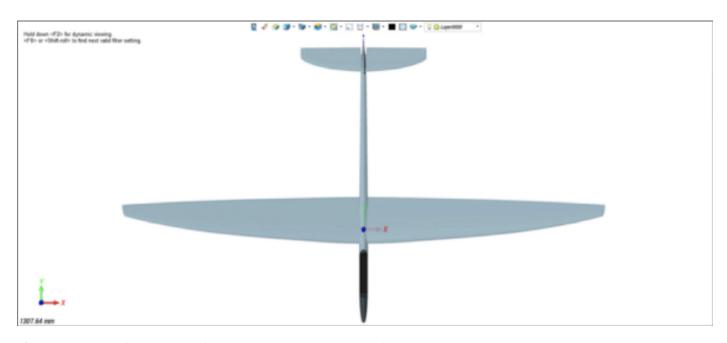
Stormbird 2M plan view — note the 'dangerous' wing shape.
